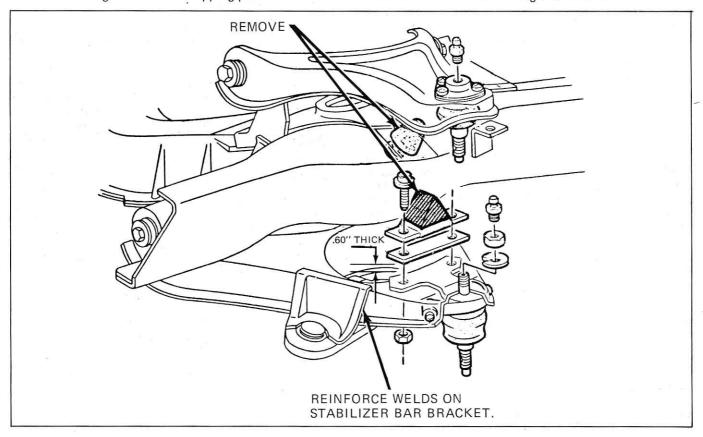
Reinforce welds on stabilizer bar bracket and remove the upper /lower bumpers.
